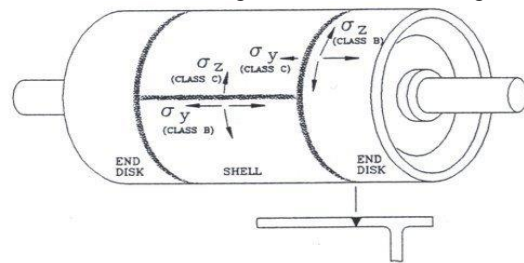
Circumferential and Axial Weld Classifications(9)
